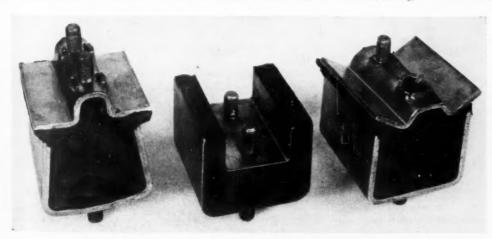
ADHESION MOUNTINGS THAT HAVE BEEN PULLED APART IN A TESTING MACHINE
